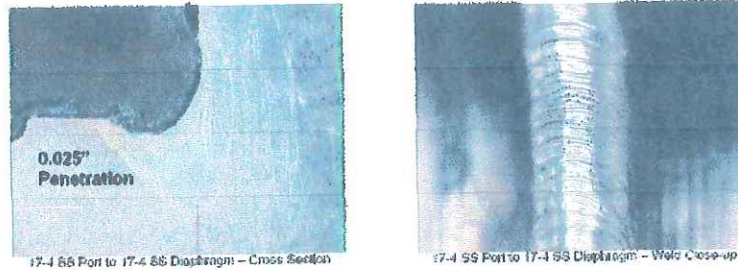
Laser weld cross and plain views of prototype parts
